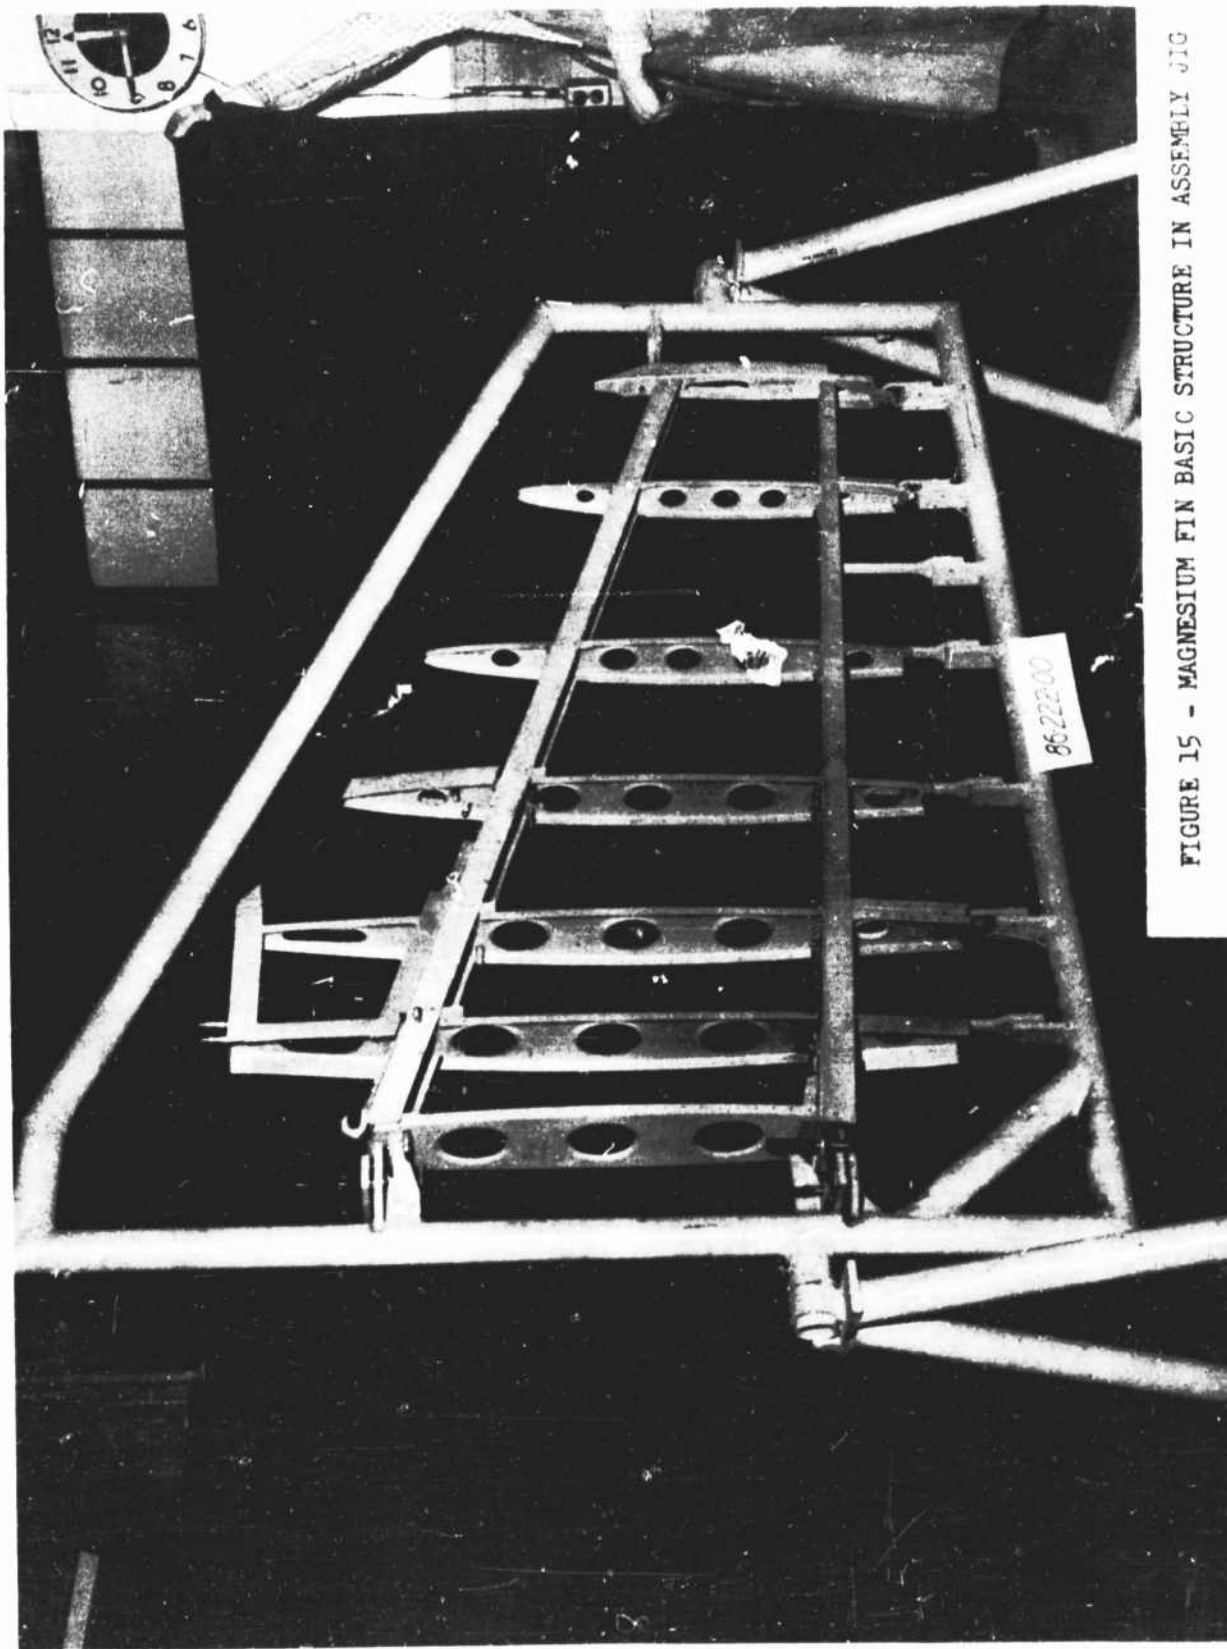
MAGNESIUM FIN BASIC STRUCTURE IN ASSEMBLY JIG
